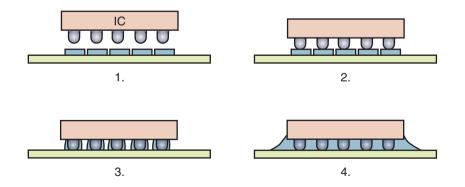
Illustration of flip-chip technology. Flip-chip package with 1. solder-plated metal balls and pads on the printed circuit board; 2. flux application and placement; 3. reflow soldering; 4. encapsulation.
